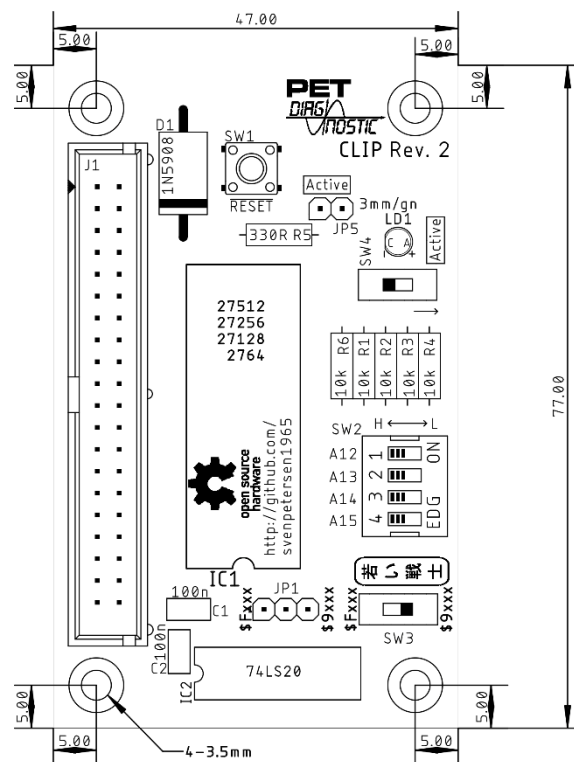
Dimensions of the Diagnostic Clip PCB Rev. 0
